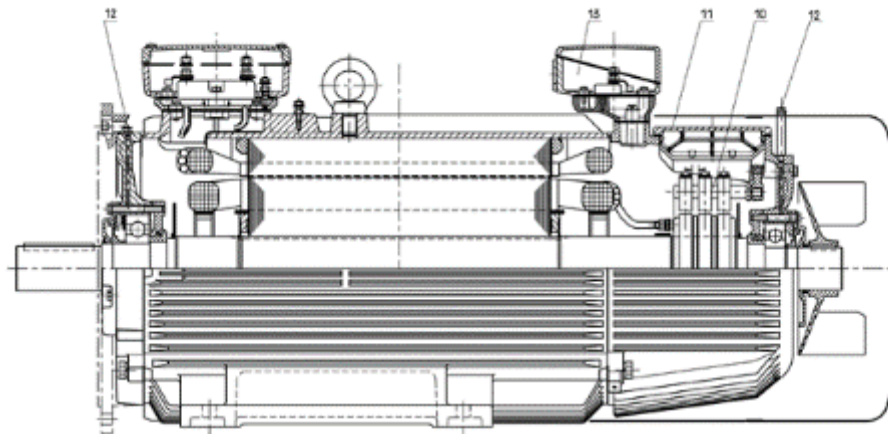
Mechanical design of slip-ring motor S11R/S11H 315 MX-LY
